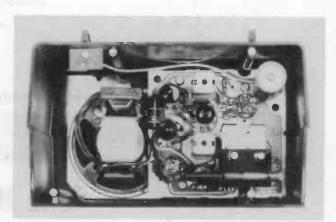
Rear View of Motorola Radio Showing Vertical Chassis Mounting and Plated Circuits.
